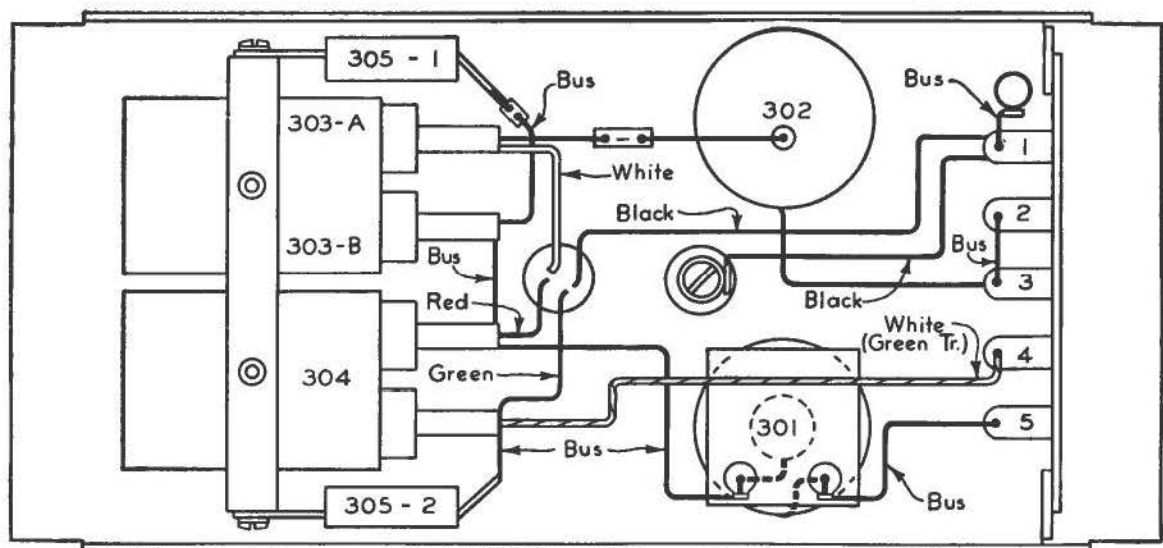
Radio Receiver BC-348-H: Wiring Beat Dynamotor Assembly
